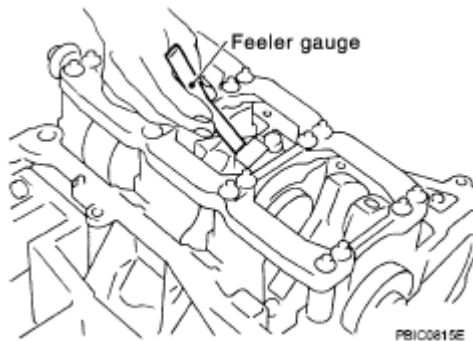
Measuring Side Clearance Between Connecting Rod And Crankshaft Arm
